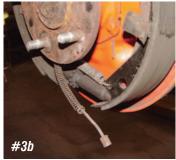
& 3b: The end of the emergency cable has a barrel connector on each side that is hooked to a lever that is connected to the rear brake shoe on each side of the car. With the cable loose, disconnect the cable end from the lever.
